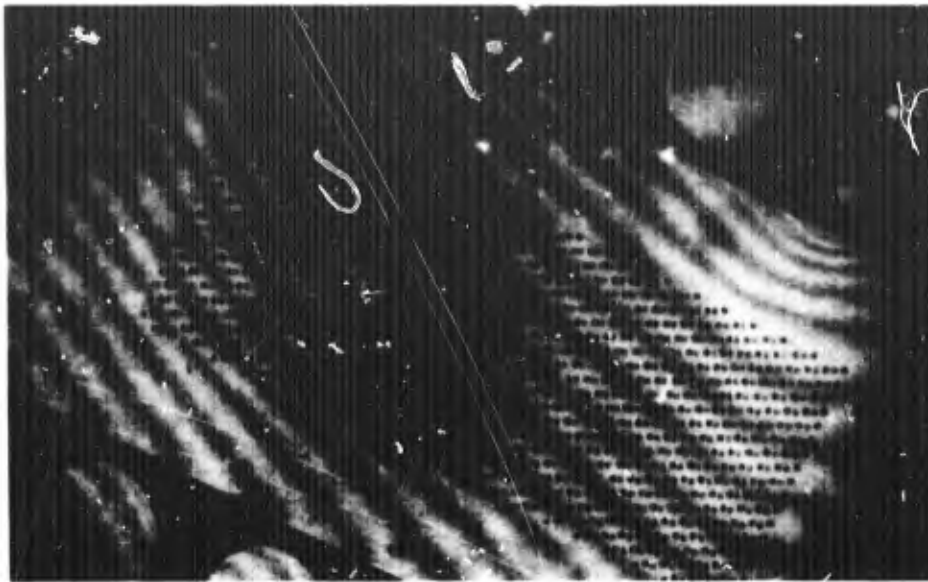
Hole Coupier Mirror Mounted in Polishing Fixture
